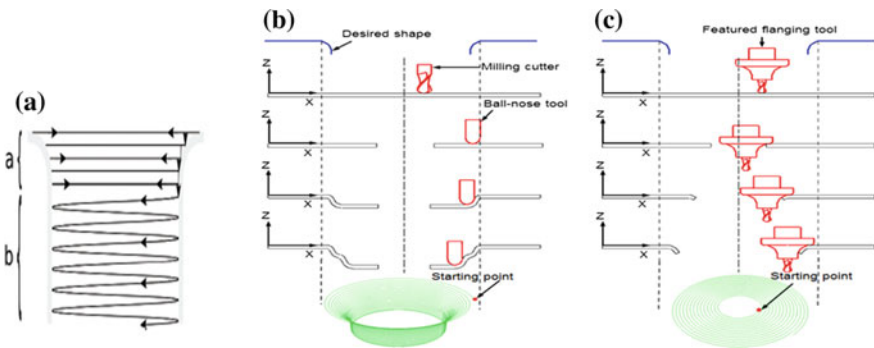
Different hole flanging tool path strategies a Tool path with portion “a” representing Z-level trajectory for conical frustum and “b” representing cylindrical helical path [12] b Tool path with ball-nose tip c tool path with milling cutter tool
